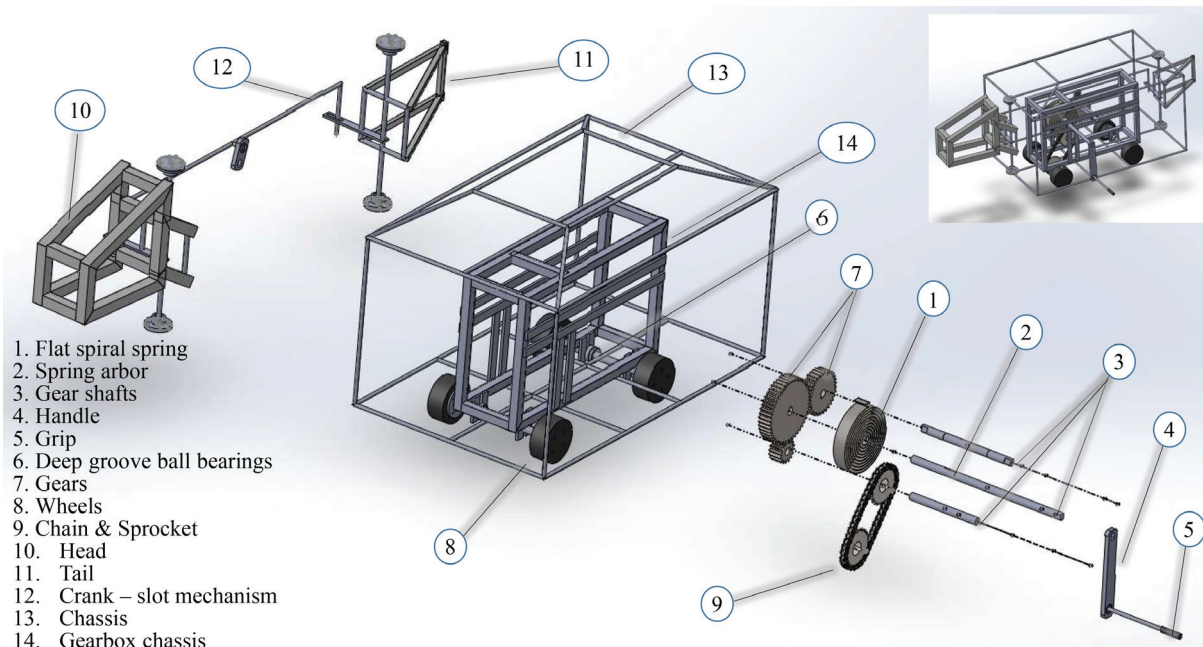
Design principle of the mechanical energy harvesting and utilization mechanism using a flat spiral spring – exploded view
